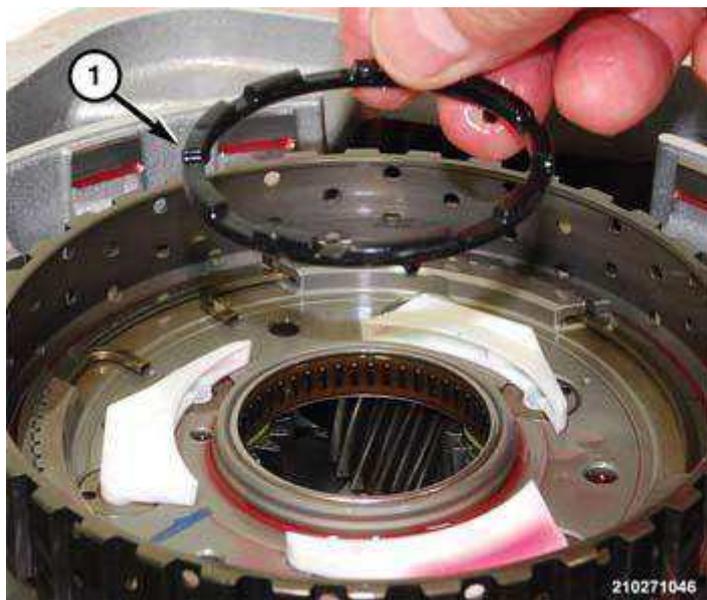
Thrust Washer & Planetary Gear Assembly Hub
